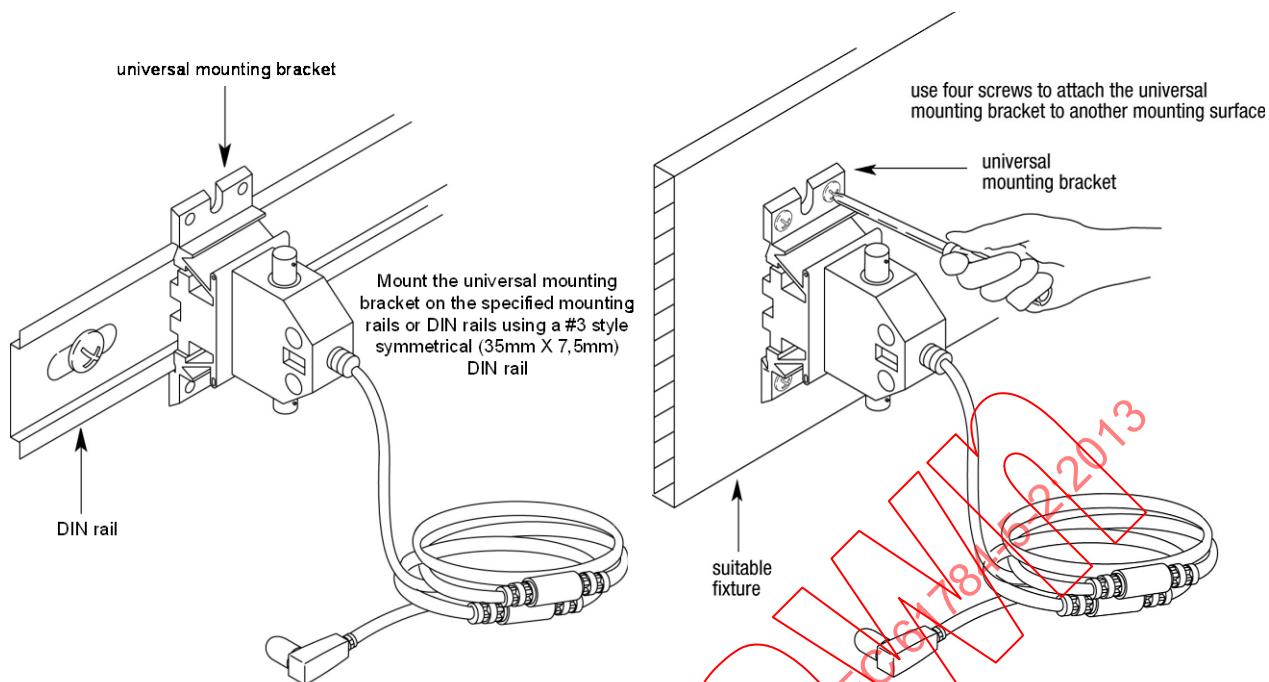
Mounting the tap assembly using the universal mounting bracket
